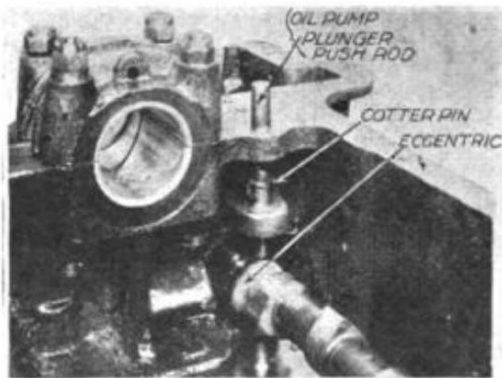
The Oil Push Rod is Actuated by Camshaft and Should be Removed Before Displacing Camshaft. Push Rod is Secured by a Cotter Pin.
